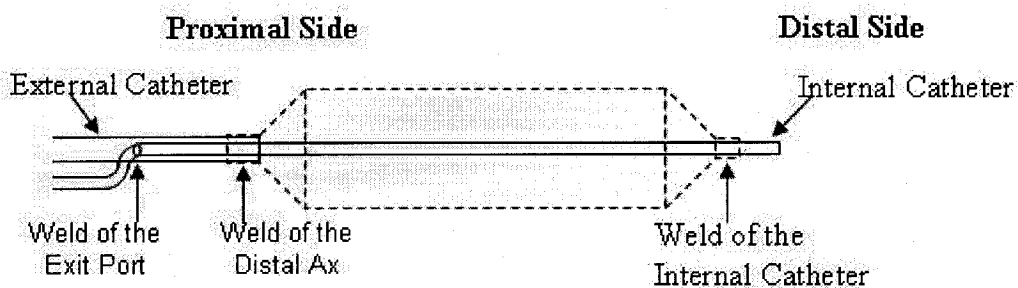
Detailed View of Rapid-Exchange Assembly
